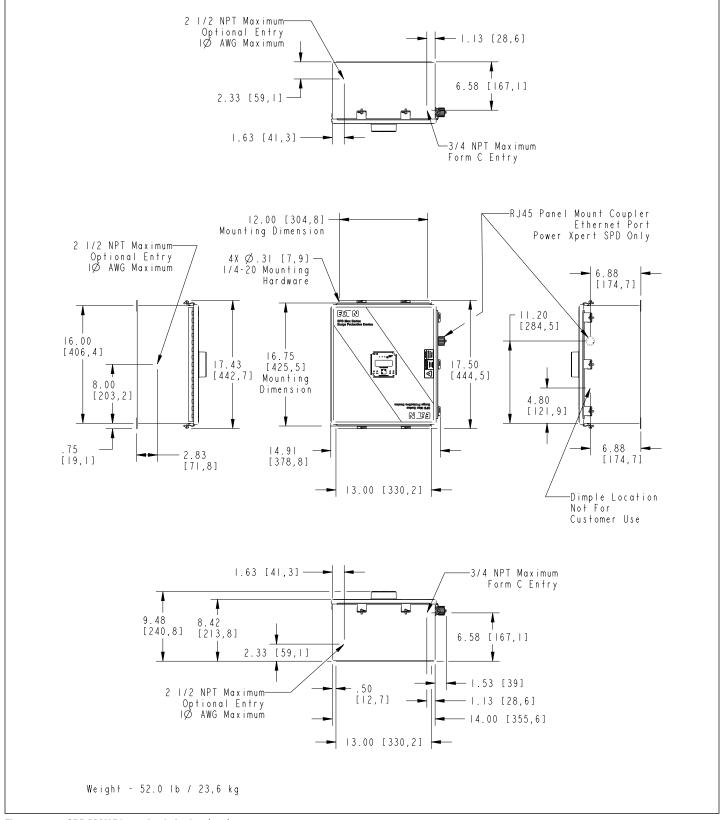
SPD MAX Dimension in Inches (mm)
